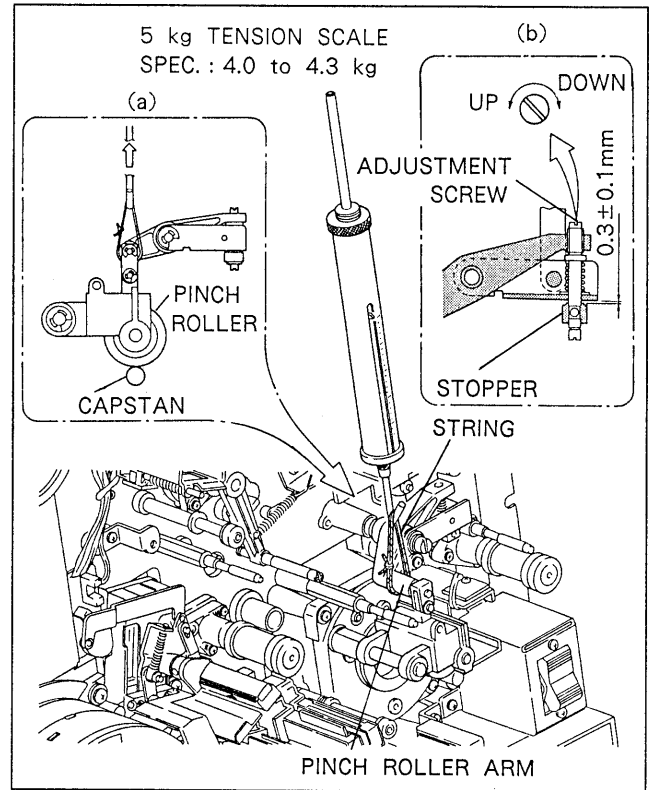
Pinch Roller Pressure Adjustment
